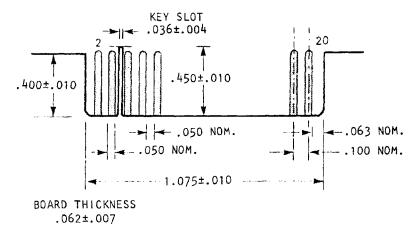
J2 Connector Dimensions (From Component Side of Board)
